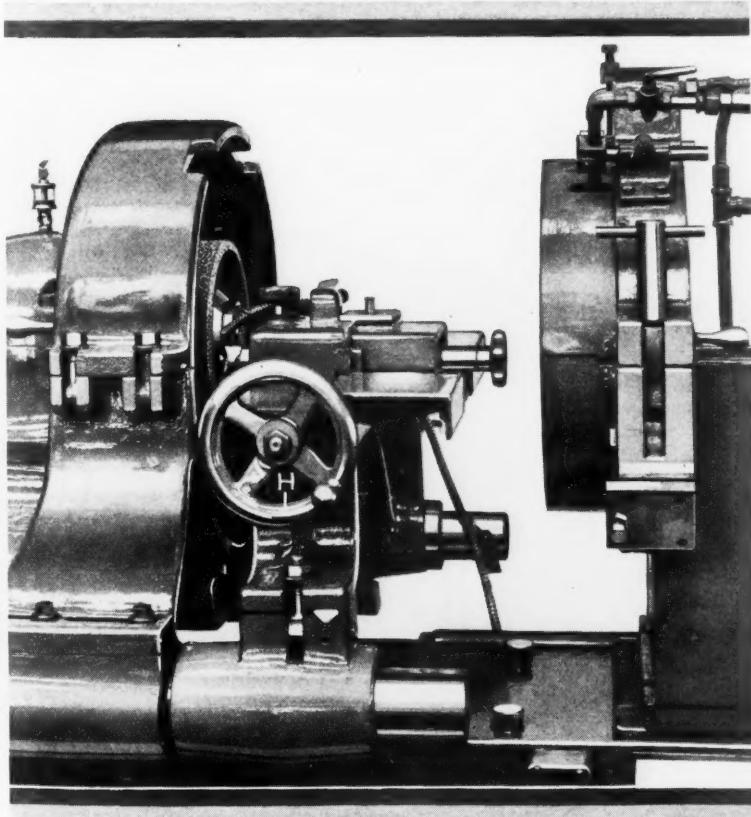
A Standard Cylinder Grinder Equipped for Grinding Spherical and Angular Pipe Joints
